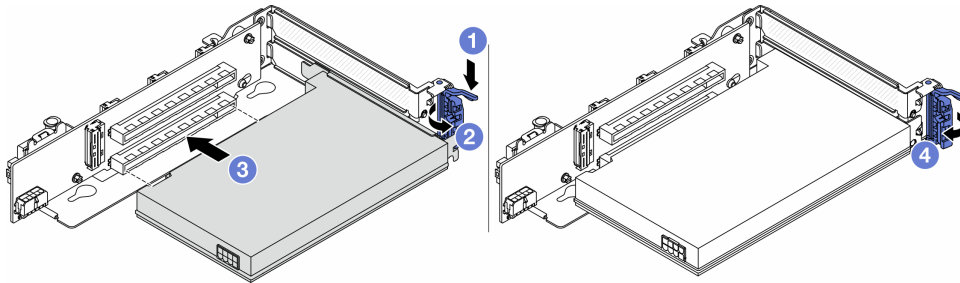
Installing the PCIe adapter to the riser 3 assembly
